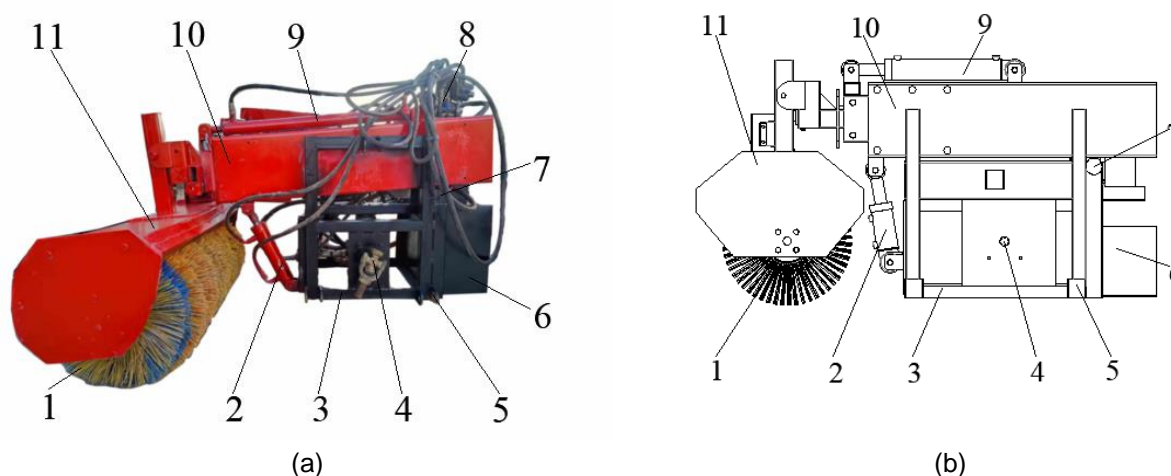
Schematic diagram of brush roll grapevine cold-proof soil clearing device (a) prototype machine; (b) front view
